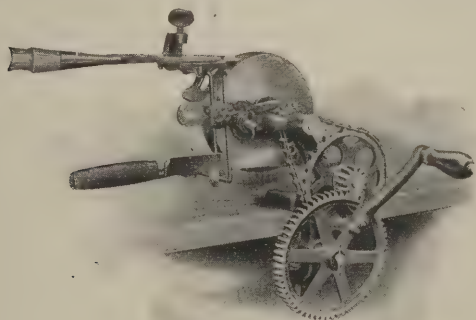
The Godfrey Grinder, with Chisel-Grinding Attachment.
